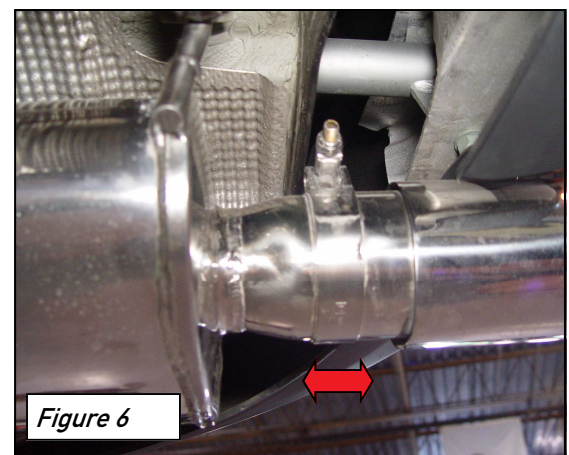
shows the overlap between part ED and part EK. Use an impact gun to tighten down this clamp after final adjustment.
